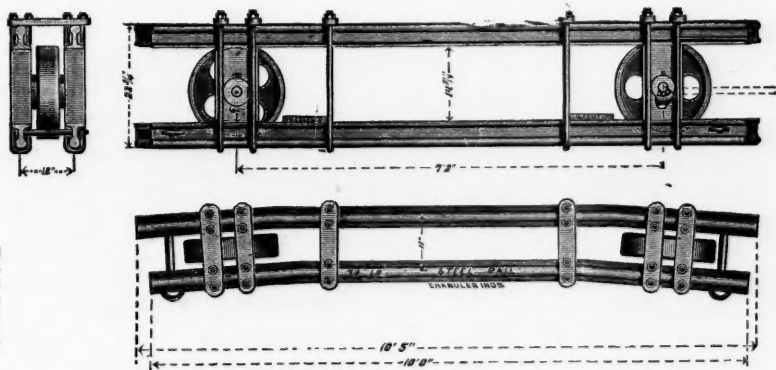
Repaired End Carriage, 1878-1881, for Riveted Turntable.
